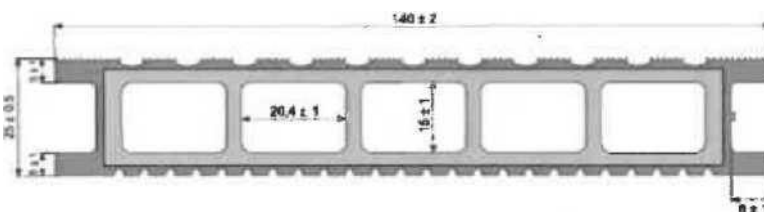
GAMRAT WPC Decking Board 140×25 mm, double-sided grooved
